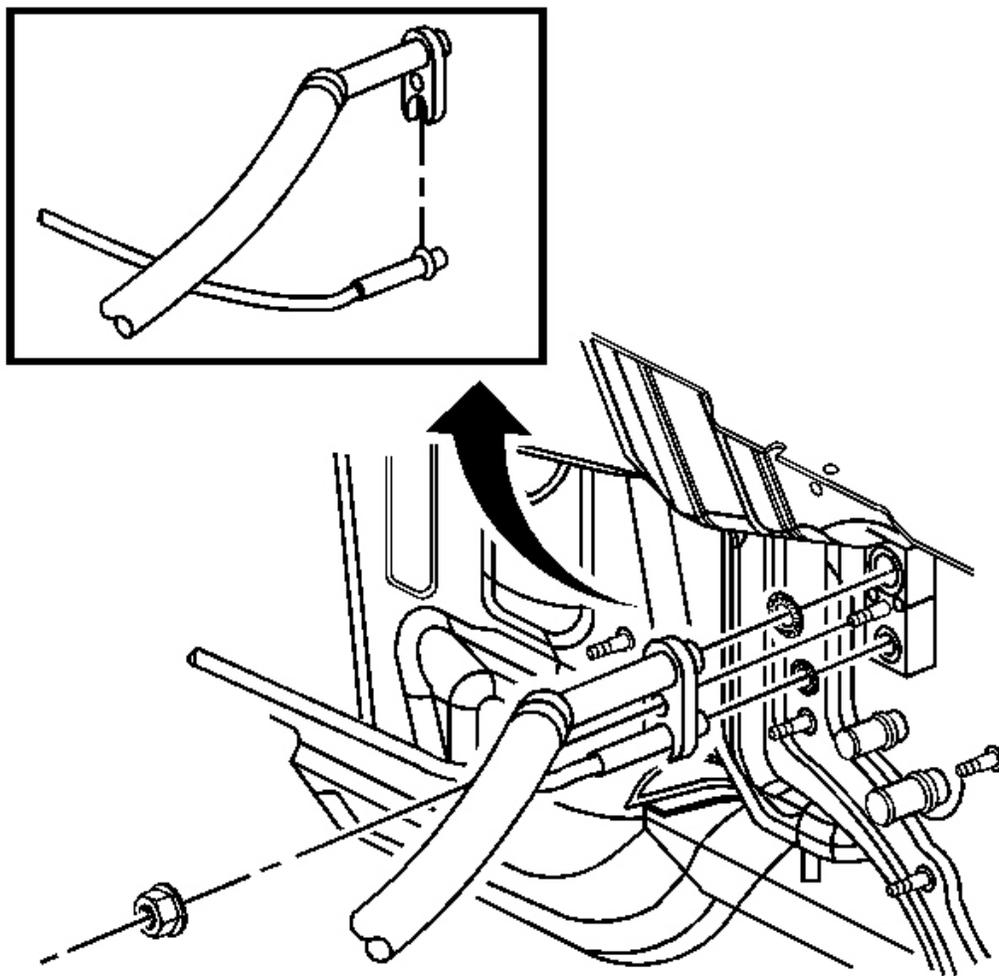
View Of Evaporator Tube & Compressor Suction Hose At TXV
